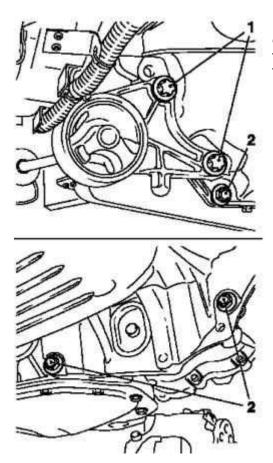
Mounting the front damping engine block: 1 - bolts fastening the block, 2 - bolts fastening the box
